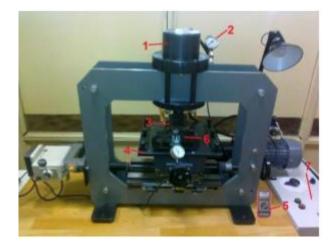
Hot imprint device: hydraulic hold (1), gauge of pressure (2), mold horn (3), controlled stage (4), thermometer (5), dynamometer (6), and control block of temperature, time, and pressure (7).[17]
